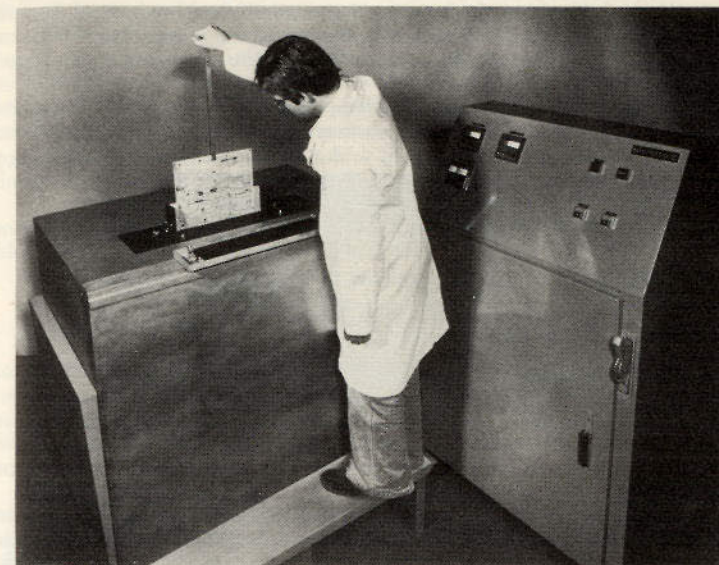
Hot-air solder-leveling machine. (Courtesy Electrovert, Inc.)
